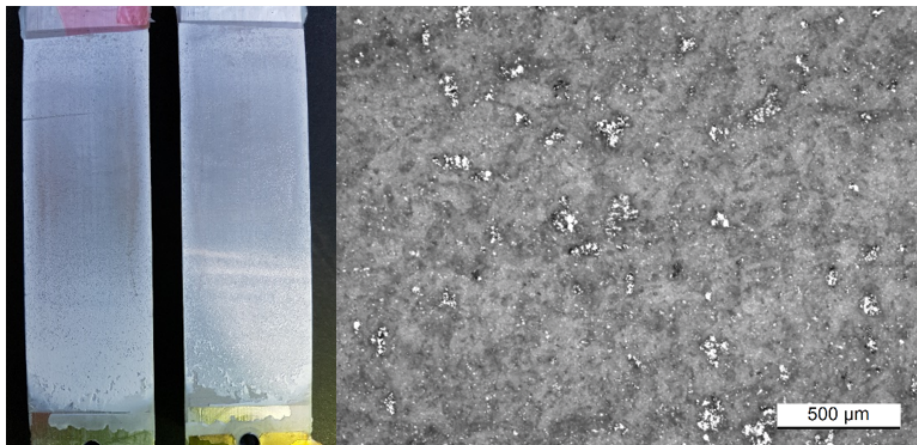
Fracture surface of a T-joint ablated with $ED=0.51 \text{ J/mm}^2$ and $H=50 \mu\text{m}$ [154]
